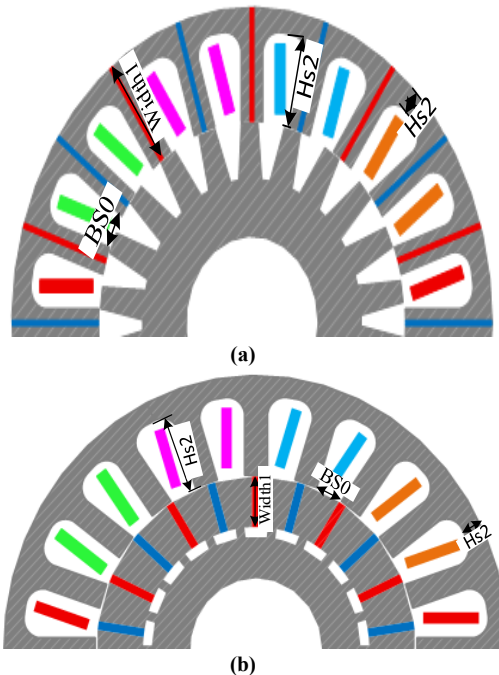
Motor model for optimization (a) Stator PMFS motor, and (b) Spoke-Type IPM configured motor.
